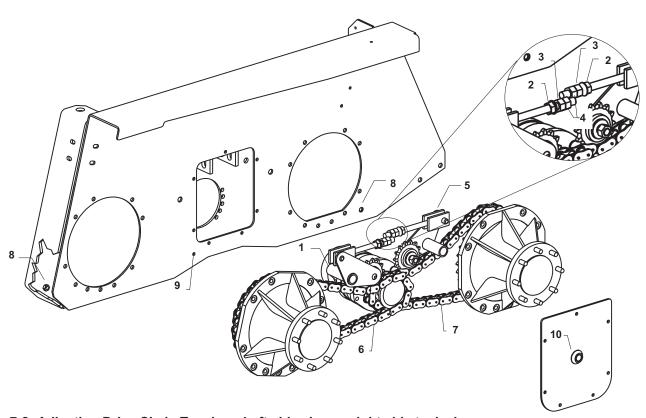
Adjusting Drive Chain Tension - Left side shown, right side typical
